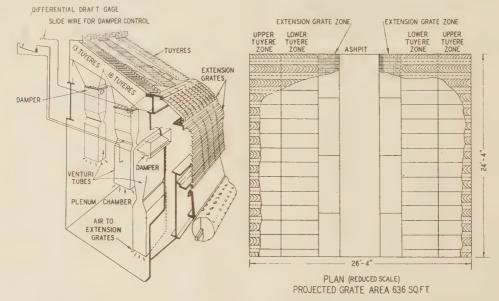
MANUAL METERED-AIR-CONTROL SYSTEM AND FUEL-BED SUBDIVISIONS AT BEACON STREET HEATING PLANT
